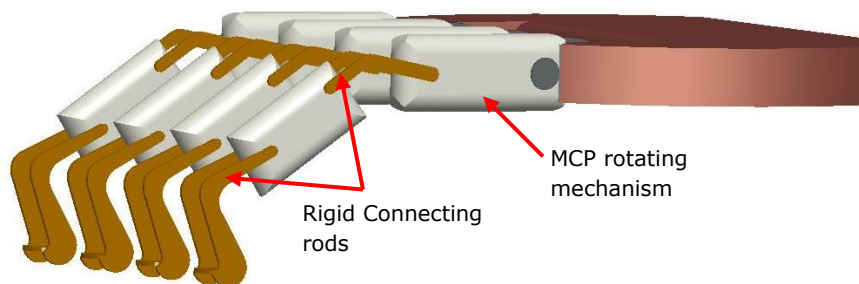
The first CAD model of the hand-exoskeleton with wrist joint, cam following mechanism and rigid connecting rods.
